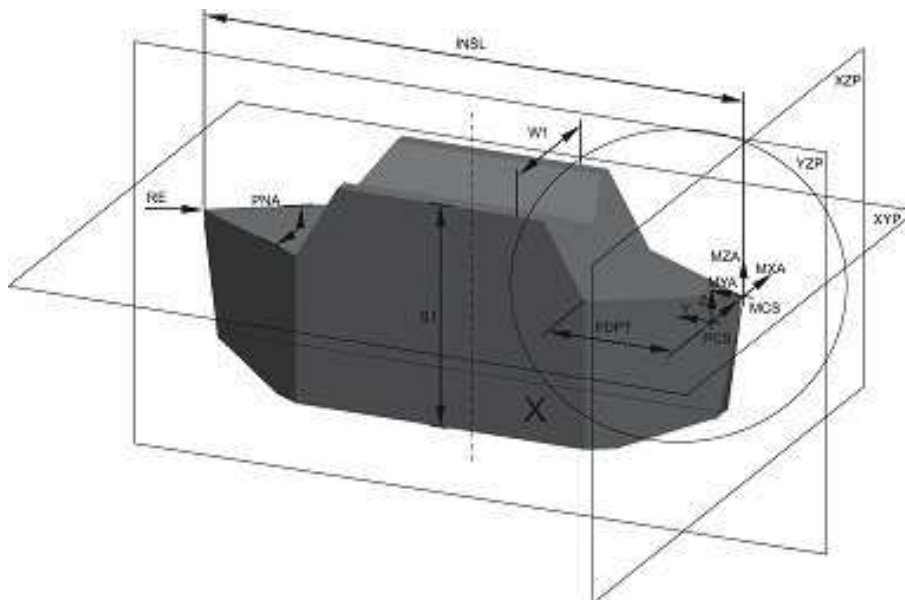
Profiling and partial threading insert with two cutting edges: basic model
